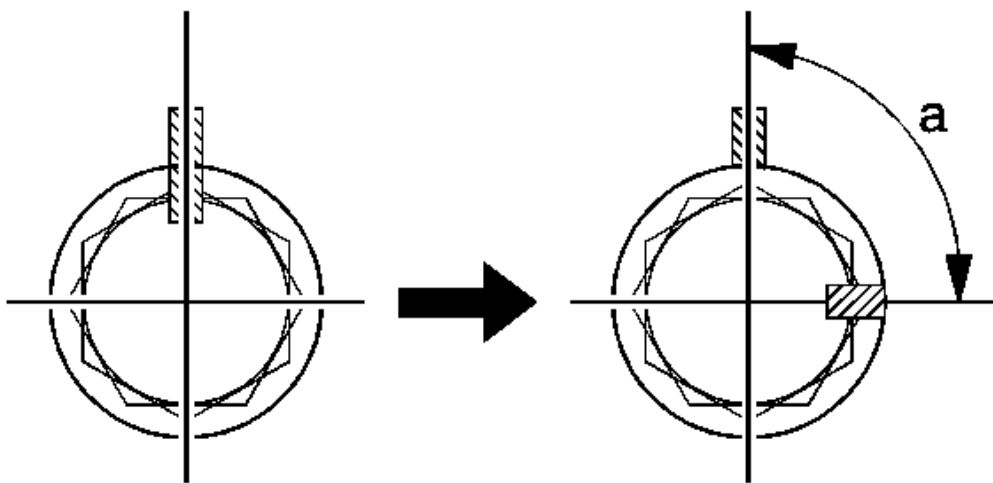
Identifying Flywheel/Flexplate Tightening Final Step
